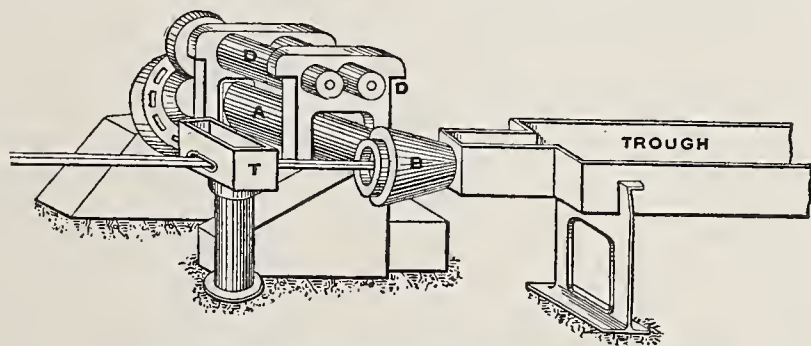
GRAY’S CABLE CORE-MAKING MACHINE
